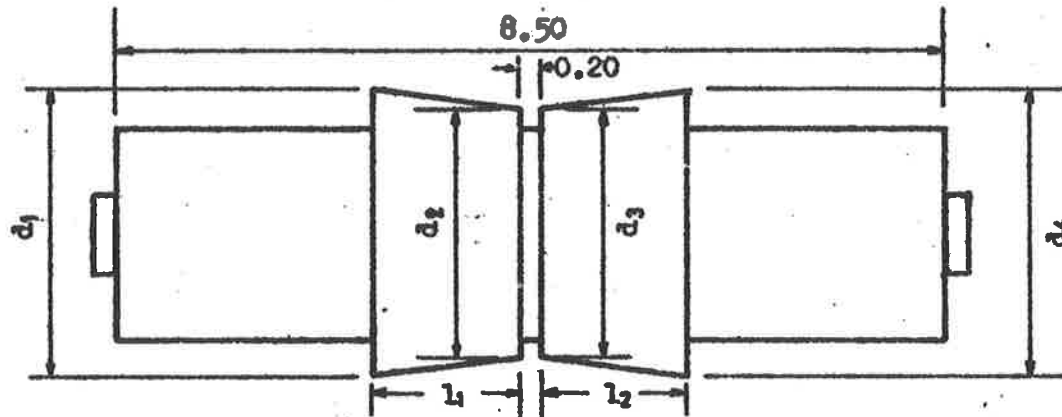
(b) Compressible flow test pieces — Bearing bore profiles.
